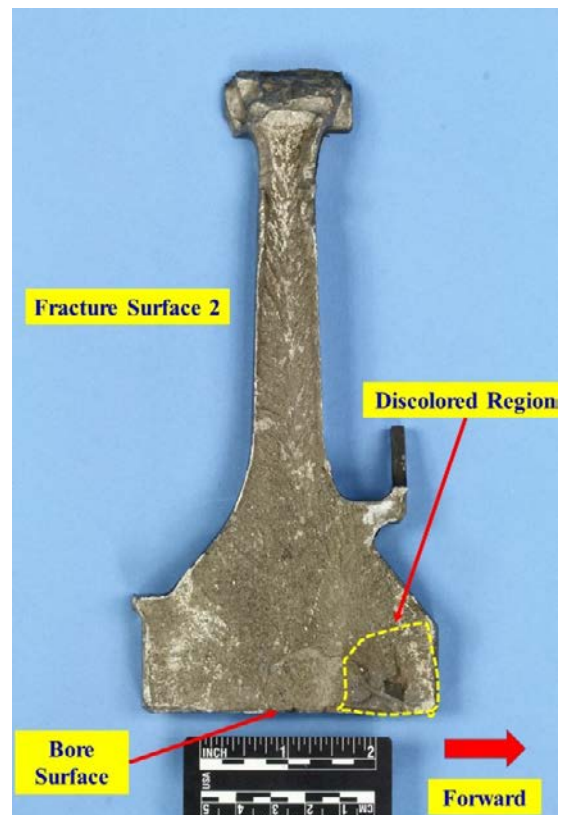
FRACTURE SURFACE 2 PRIOR TO CLEANING
